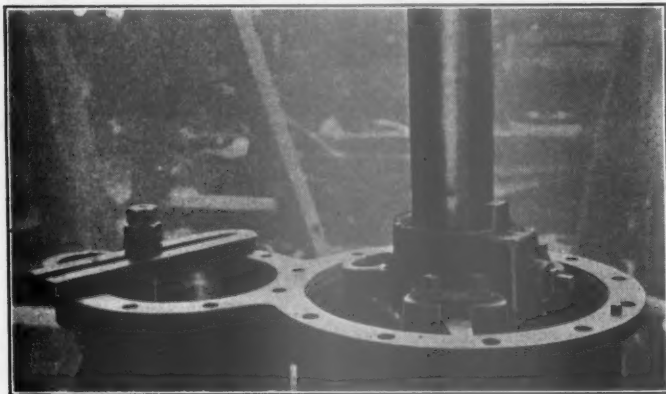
Adjustable Head Used in Boring Air Compressor Cylinders
